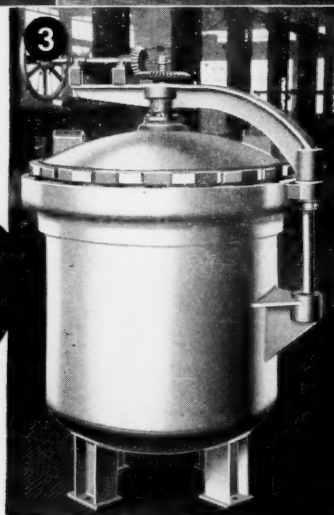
vertical vulcanizer with quick-opening door. Door is handled by self-contained arm and gear-operating mechanism. Hand or motor operation.
